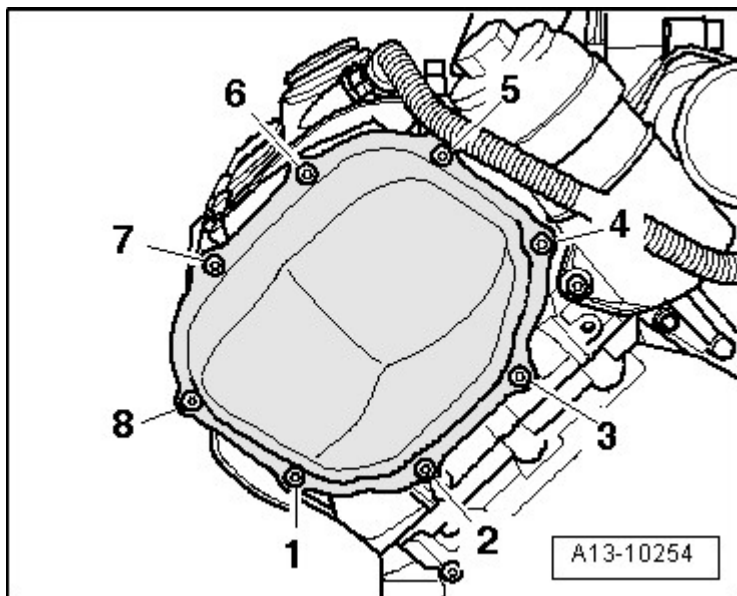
Left Timing Chain Cover Bolt Tightening Sequence & Specification
